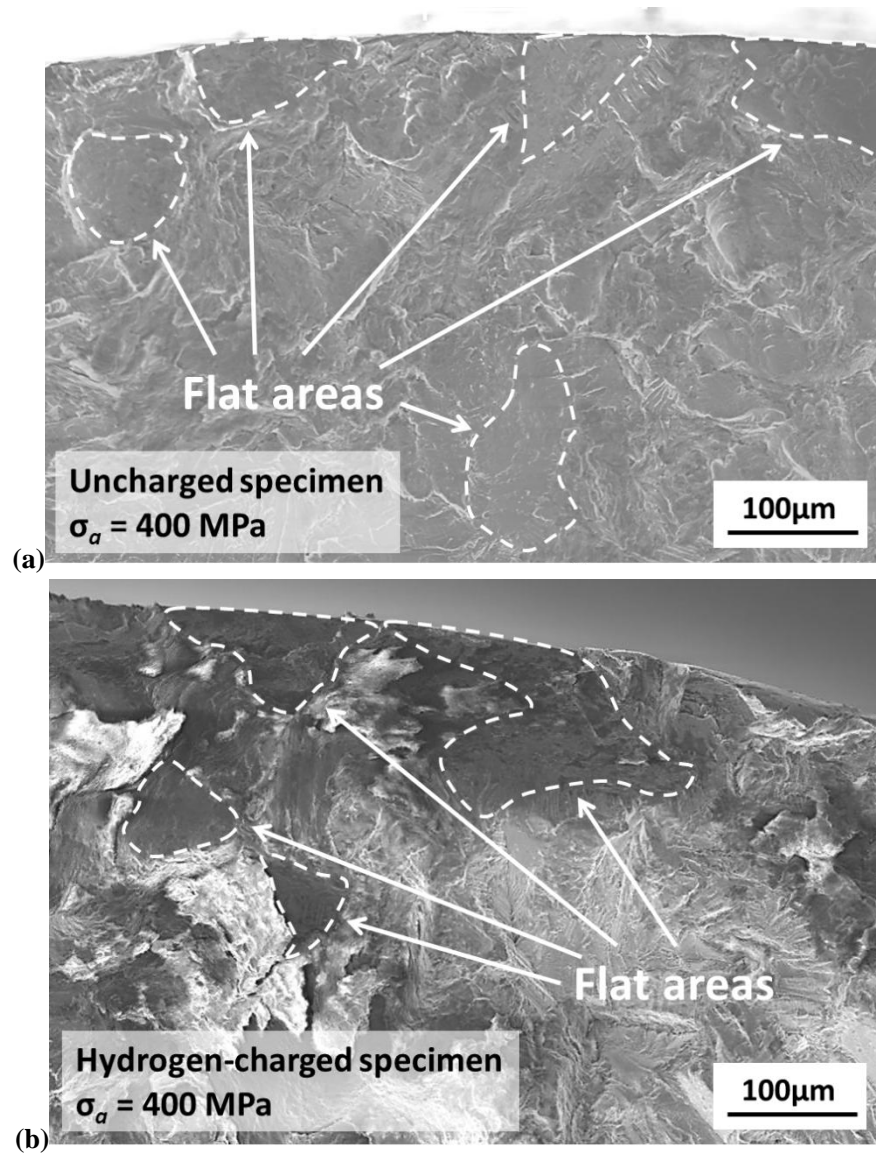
Fracture surfaces at 400 MPa: (a) uncharged specimen; (b) hydrogen-charged specimen.
